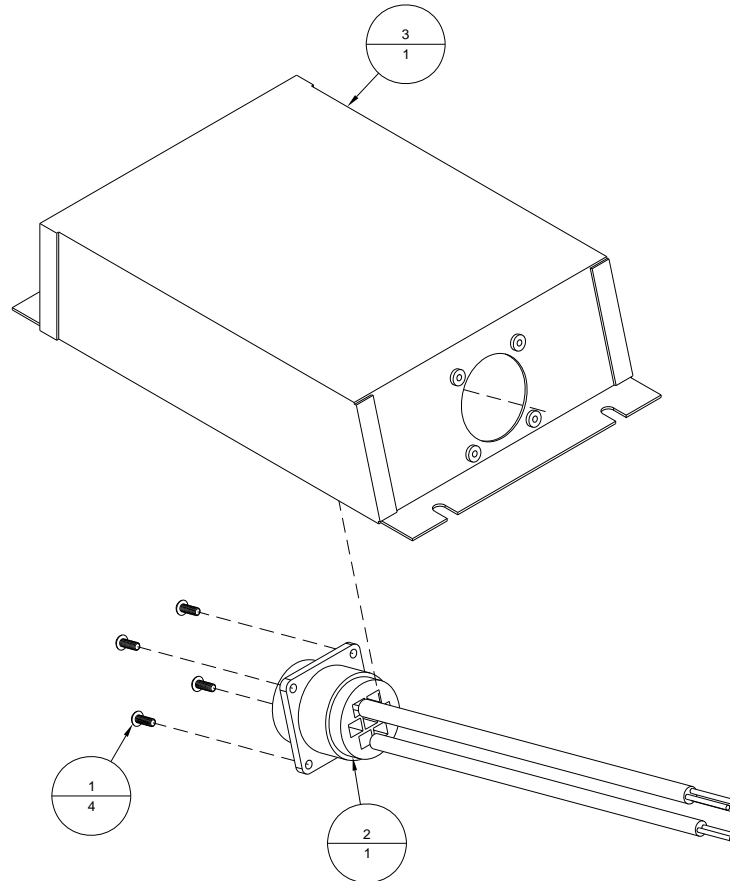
9105461A - Connection Box Assembly, Conveyor
